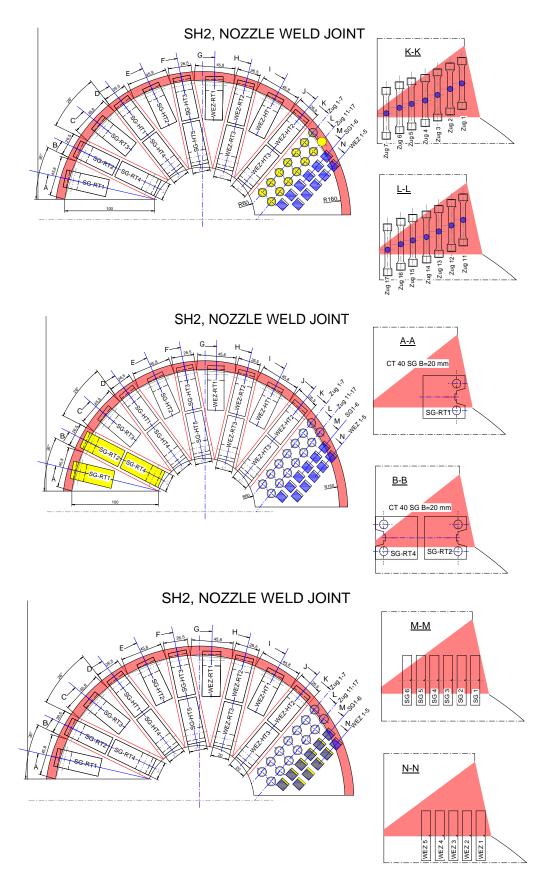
Partial cutting plan of Fillet Weld of Nozzle
